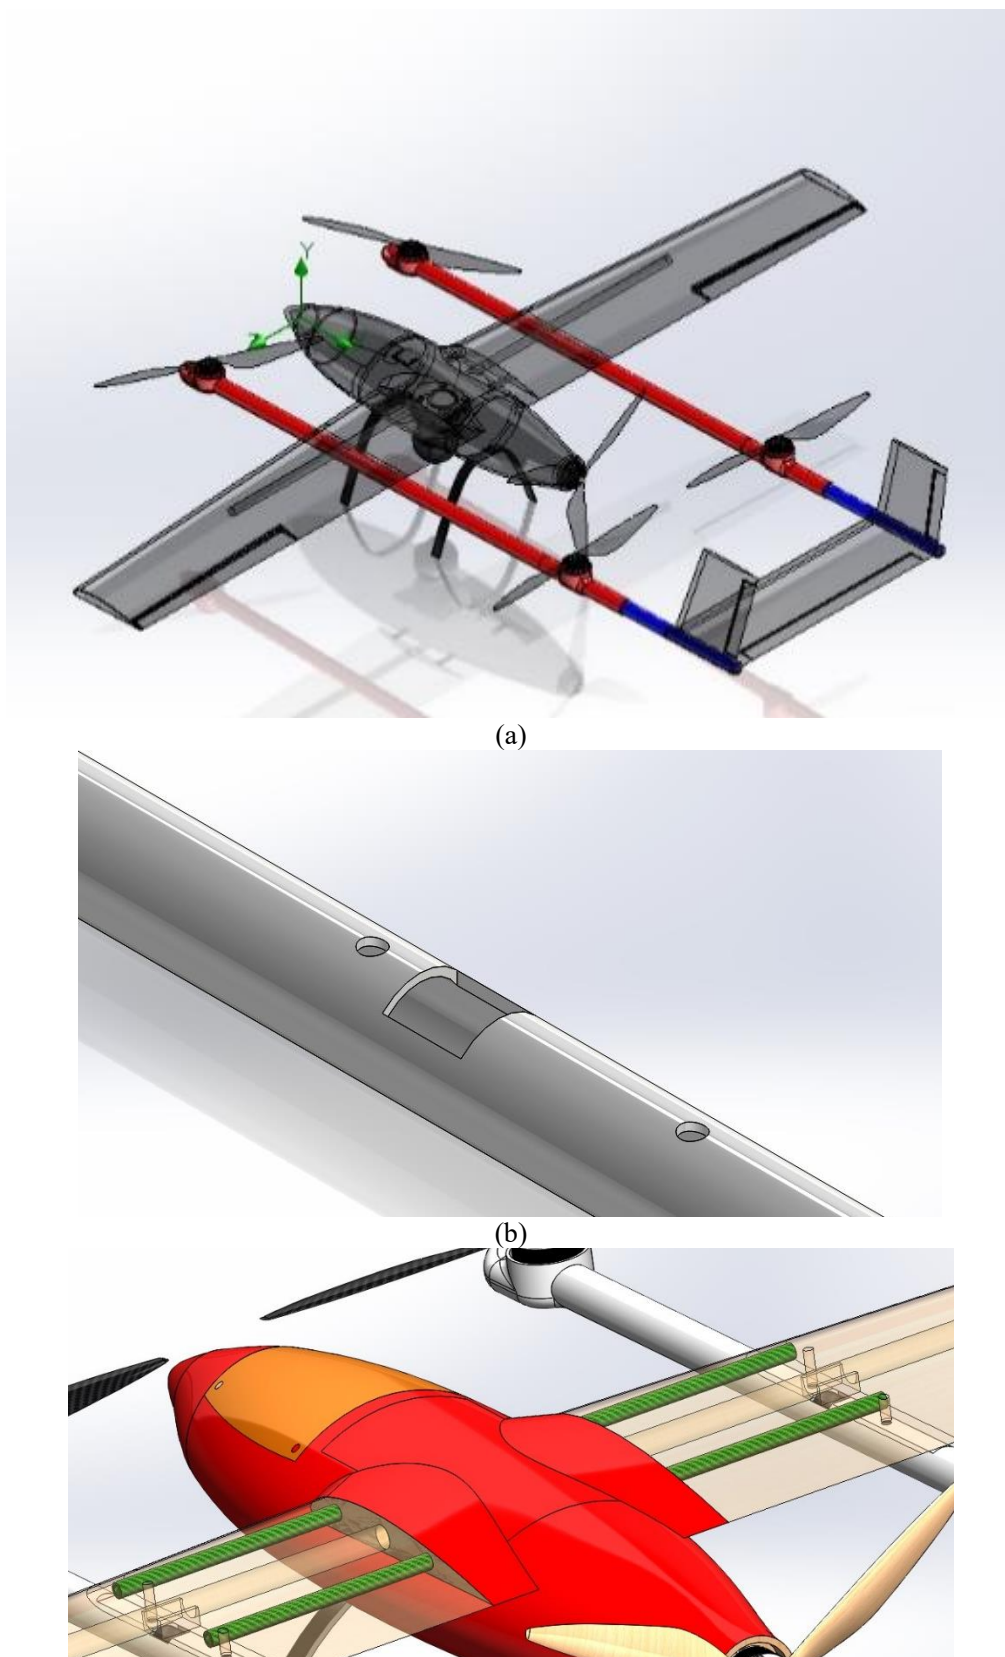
(a) Frame holding the UAV; (b) The holes where the wires pass through to reach other different parts of the UAV; (c) Rods inserted inside the fuselage
